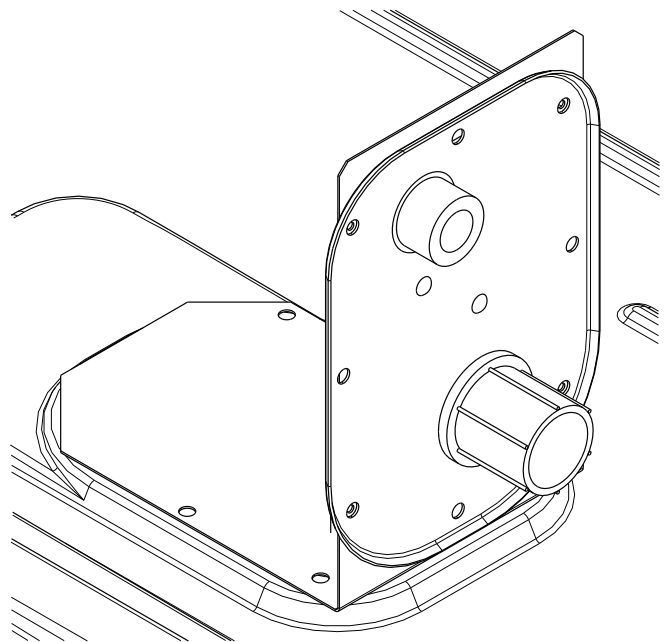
Thru-the-Base Fitting Assembly (Shown in Shipping Position)
